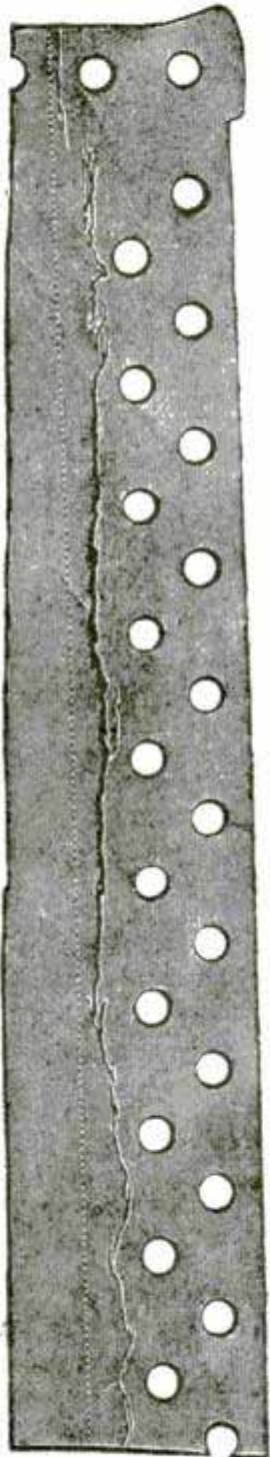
SECTION OF A BOILER PLATE WITH A LAP-JOINT CRACK.
